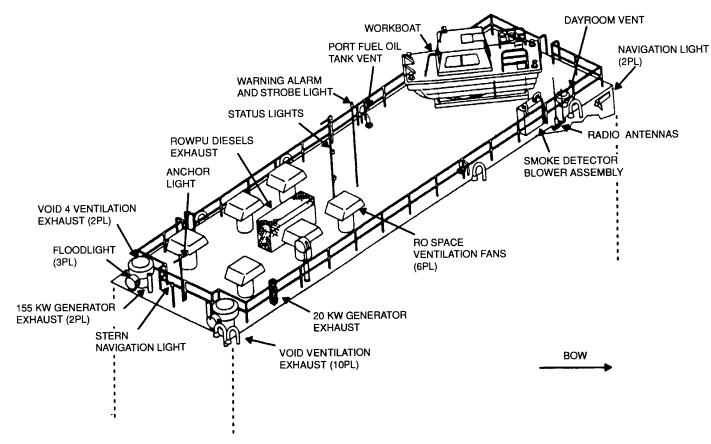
Major Components of ROWPU Barge Systems and Equipment - Deckhouse Roof (Sheet 1 of 3)
